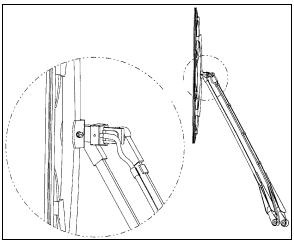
WINDSHIELD WIPER (MOTOR SIDE) 2333
